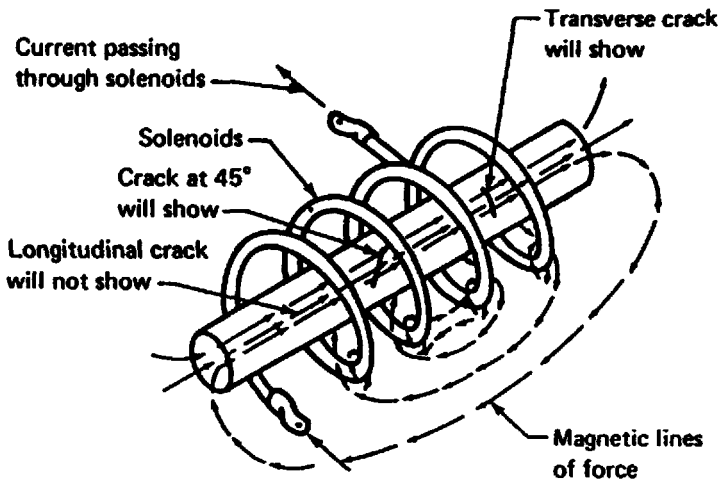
Part to be Inspected Can Be Magnetized by Making it the Core of a Solenoid
